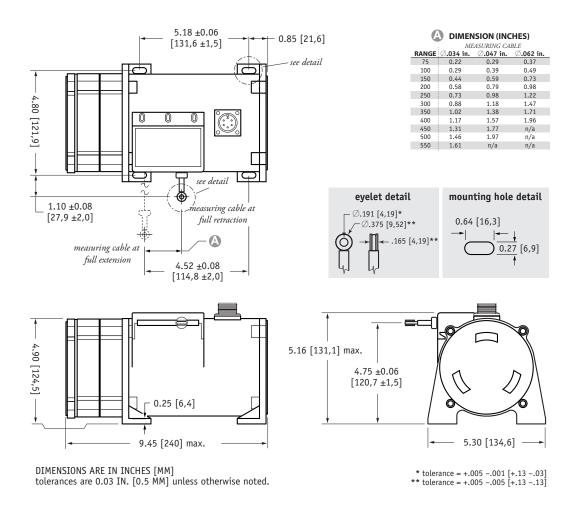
Outline Drawing (52 oz. cable tension only)
